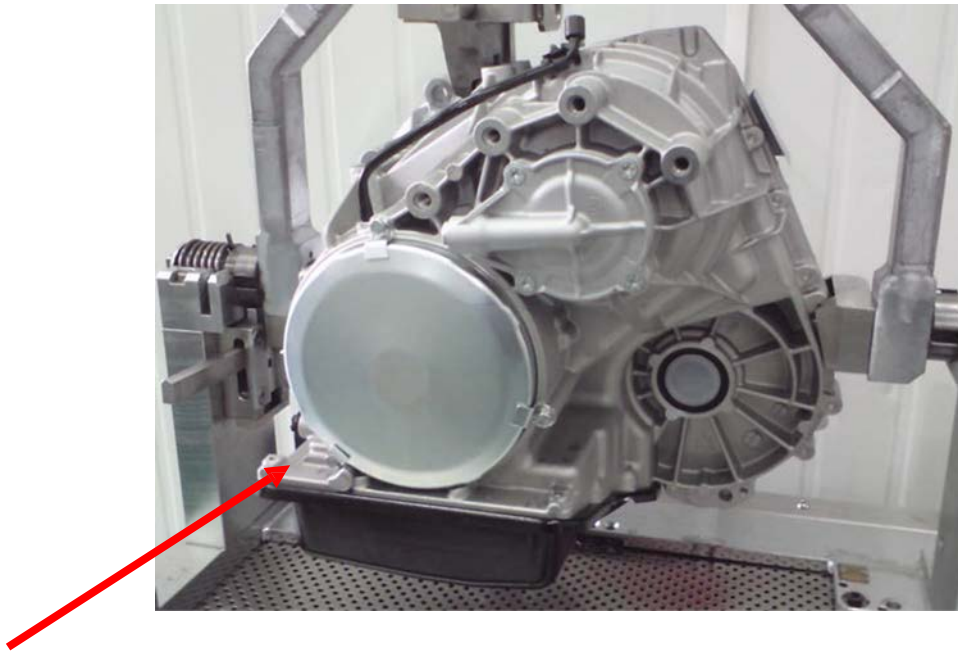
Remove the end cover of the driving bevel pulley shaft.
